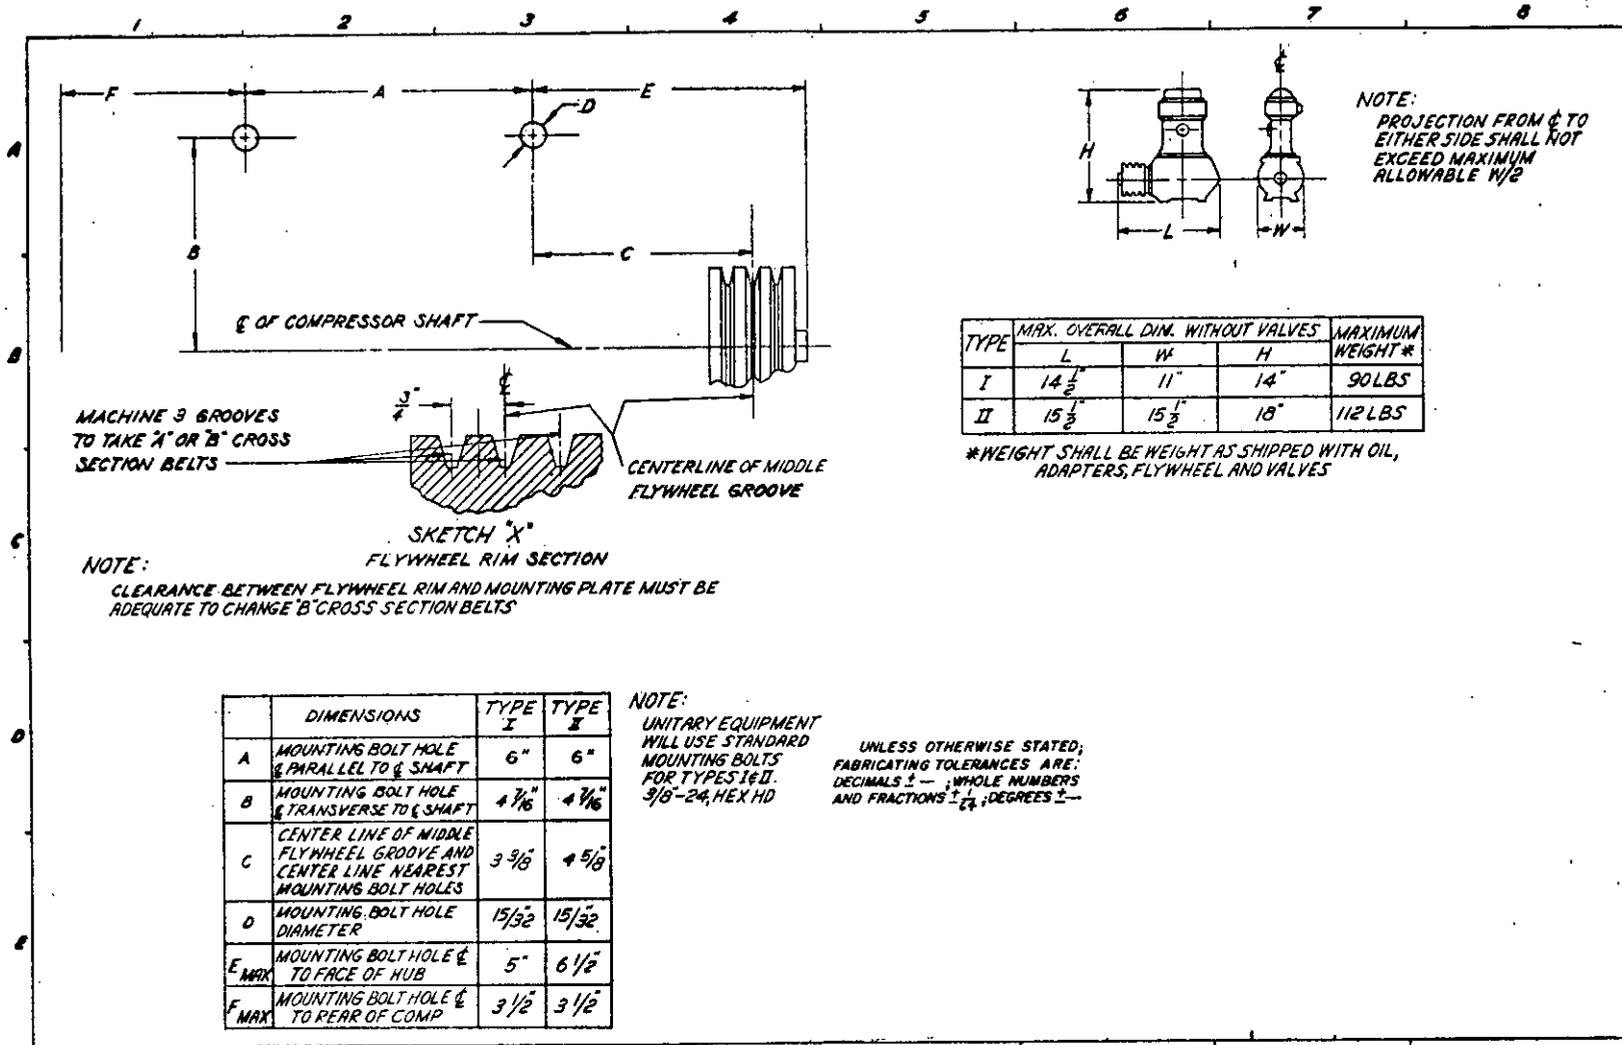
Compressor, reciprocating power-driven, open type, for use with refrigerant 12, compressor mounting bolt layout, flywheel details, overall dimensions and weight.
